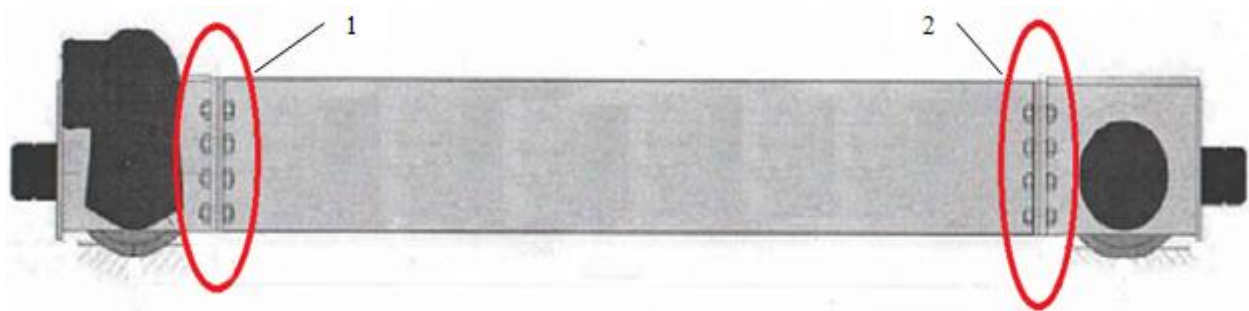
Modular design of the end beam with bolted flange connection: 1 — flange connection of the drive wheel module; 2 — flange connection of the loose wheel module
